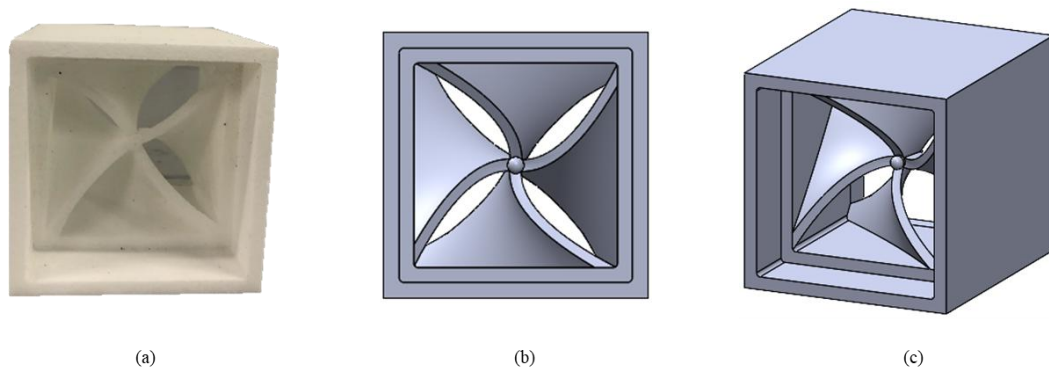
Swirler devices (a) 3D printed, (b and c) CAD model
